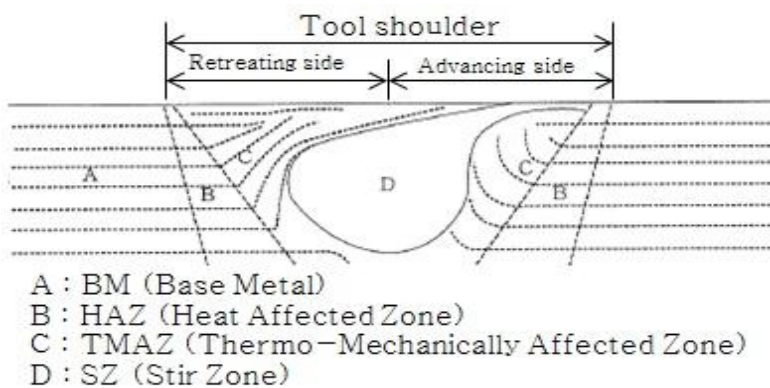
Macrostructure of friction stir welded joints
